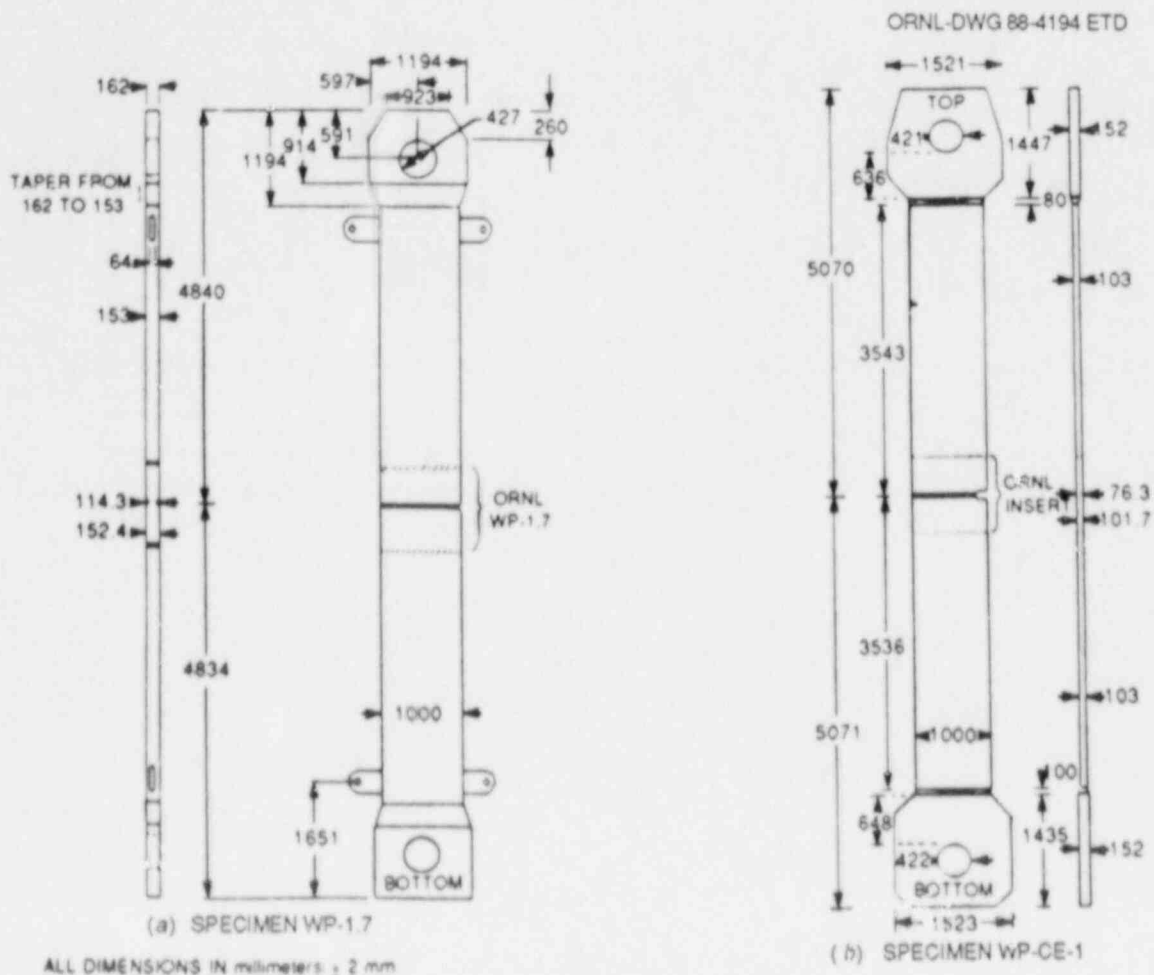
Overall dimensions of HSST wide-plate crack-arrest specimens and pull-plates for (a) specimen WP-1.7 and (b) specimen WP-CE-1.
